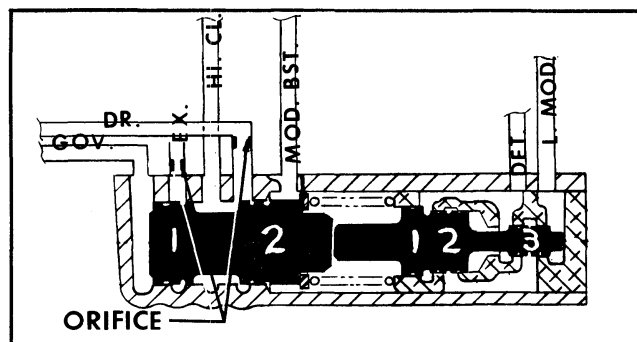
B-13 Shift Valve and Shift Control Valve - High
